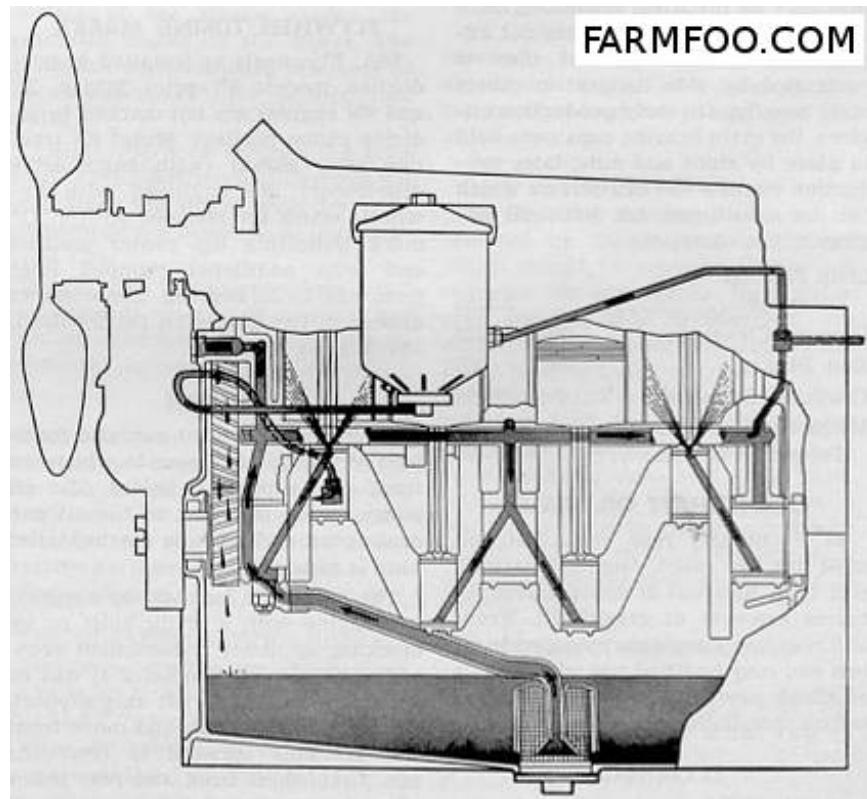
Oil circuit of 2N-8N-9N engine showing path of pressure oil and lubrication of walls and gears.
